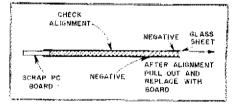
A method of checking negative alignment for double-sided circuit boards.
